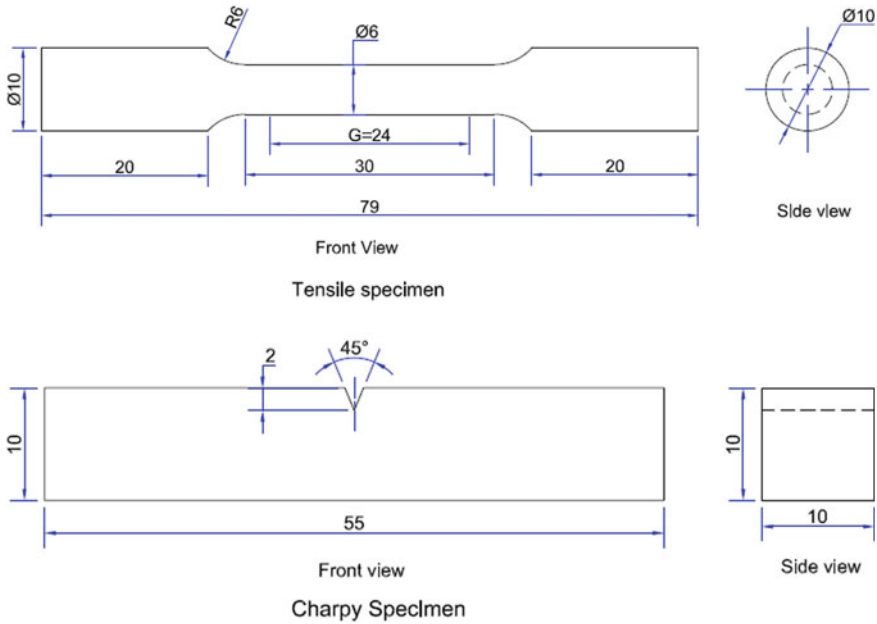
Dimensions of the tensile and Charpy samples/specimens
